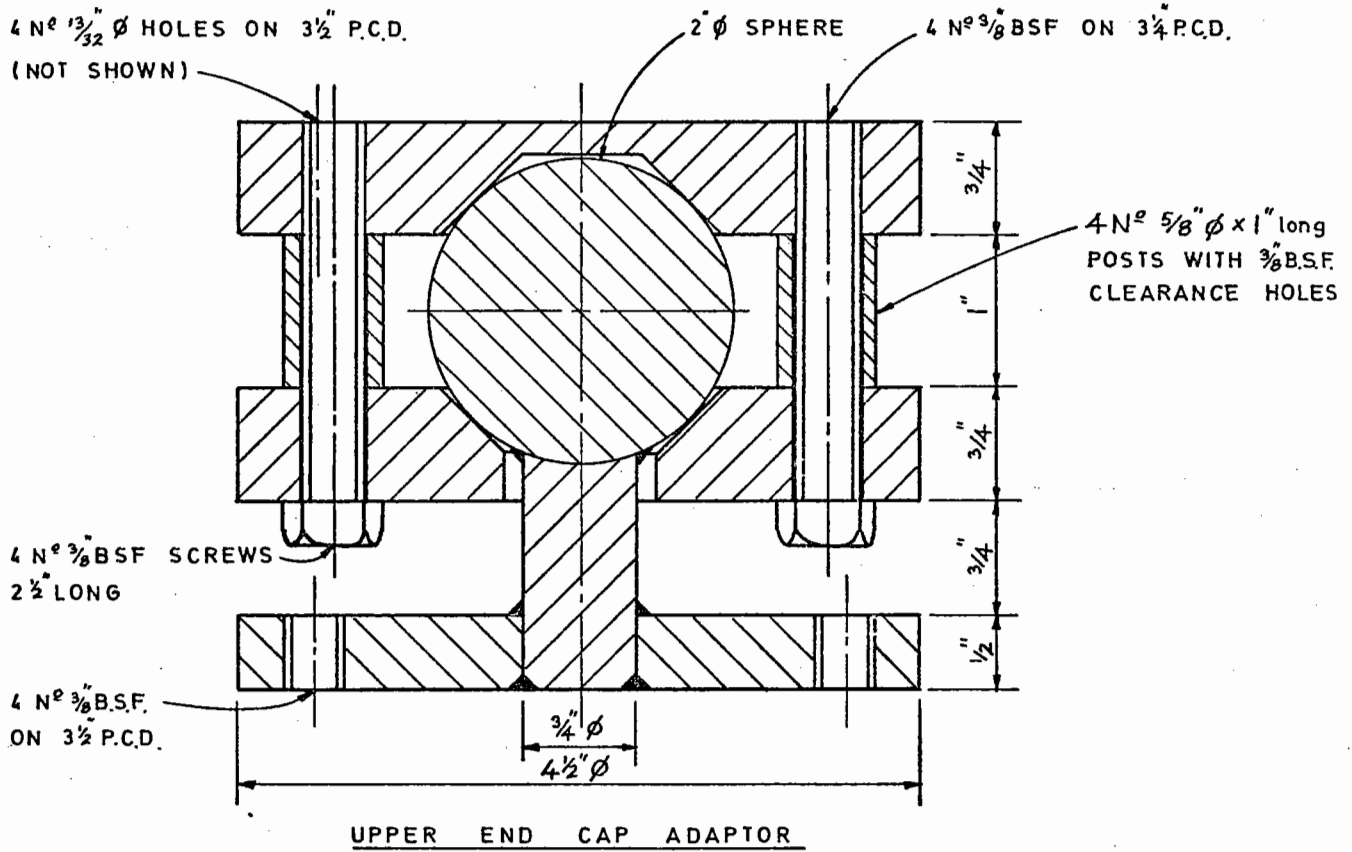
DETAILS OF END CAP ADAPTORS FOR USE WHEN TESTING CONCRETE SPECIMENS
